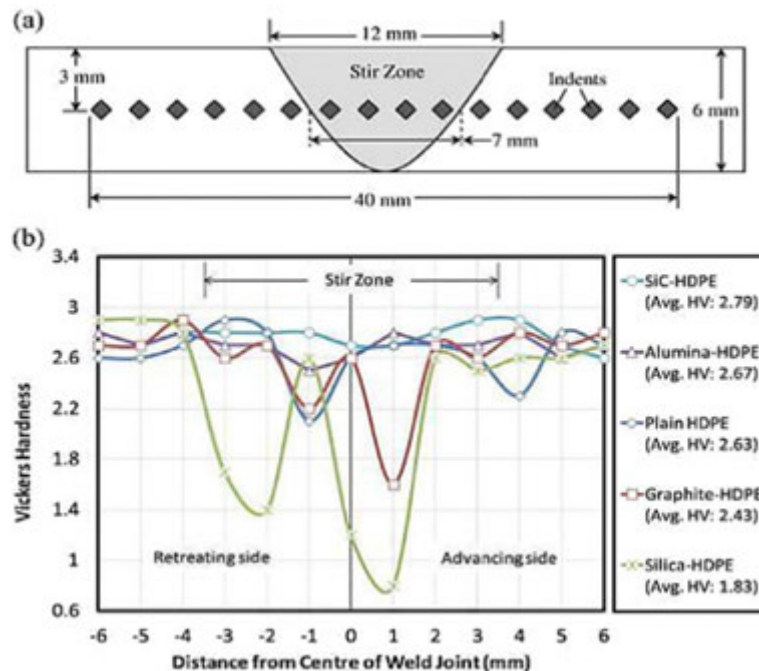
(a) Schematic of the weld cross-section and indent location and (b) hardness profiles across weld nugget for different composite joints. Reproduced from Raza, K., *et al.*, 2017. On the friction stir welding, tool design optimization, and strain rate-dependent mechanical properties of HDPE–Ceramic composite joints. *Journal of Thermoplastic Composite Materials* 31 (3), 291–310.
